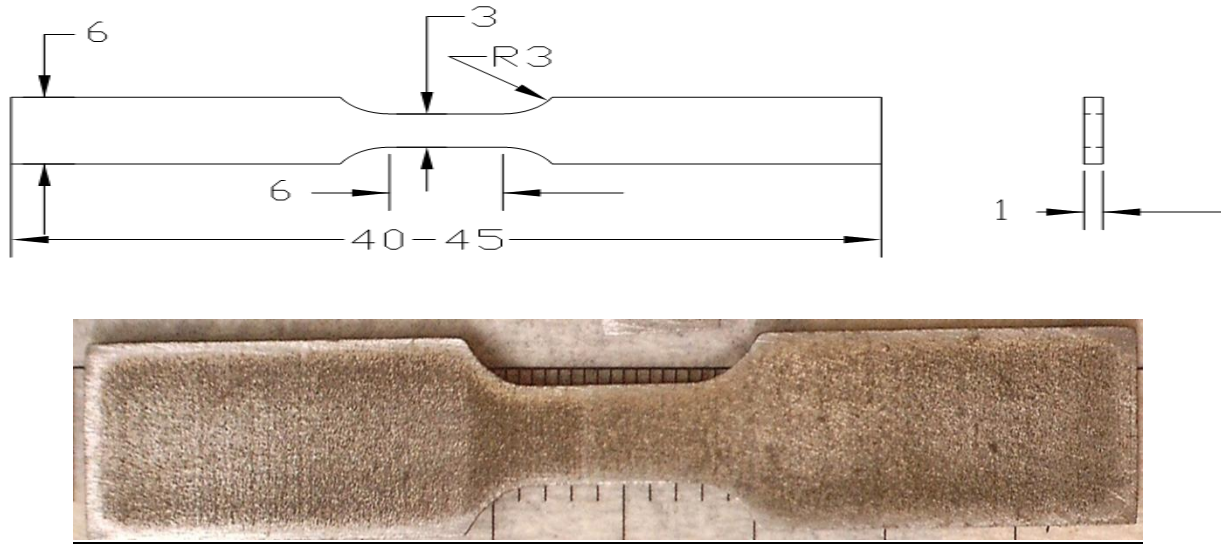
Dimensions of T4 type specimen (ASTM 370)
